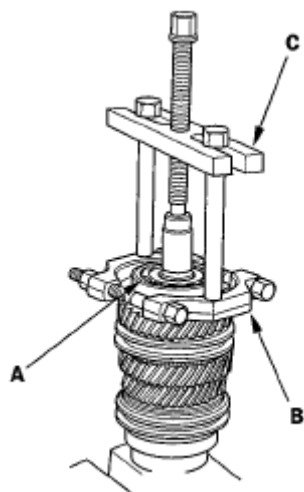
Identifying Angular Ball Bearing, Bearing Separator And Bearing Puller
